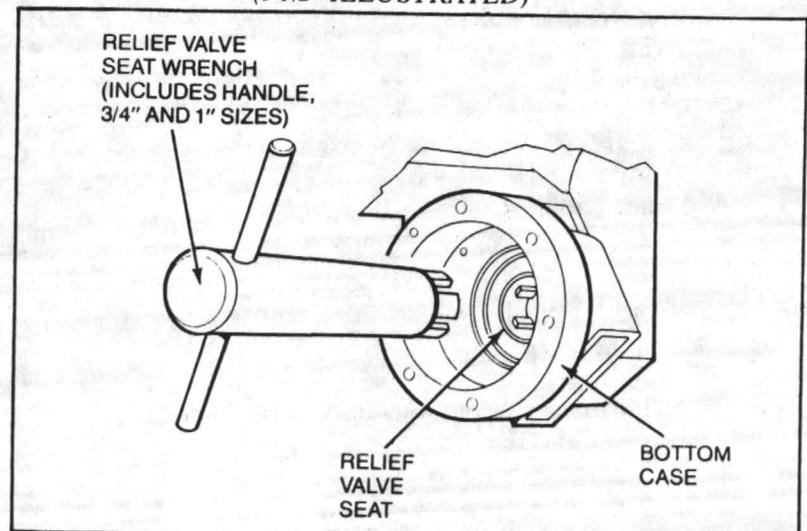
B. RELIEF VALVE SEAT REPLACEMENT FRP-II
